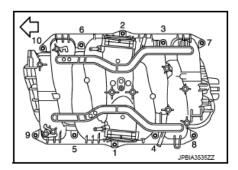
Intake Manifold Mounting Bolts Loosening Order Courtesy of NISSAN MOTOR CO., U.S.A.
